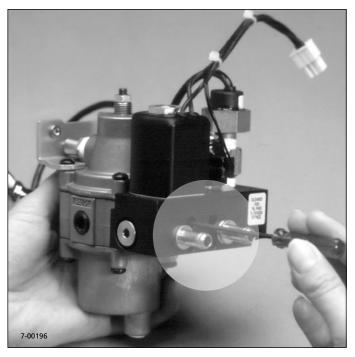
Separating the oxygen solenoid assembly from the oxygen regulator
